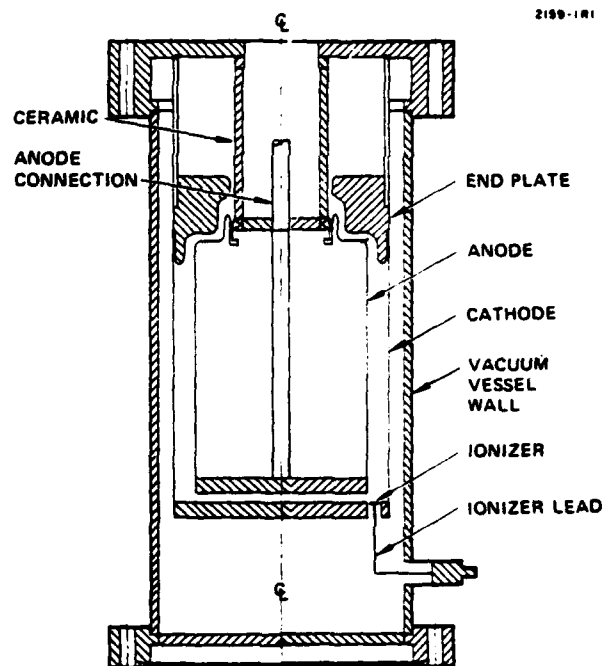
Sectional view of 2.7 kA, 60 kV crossed field tube.
